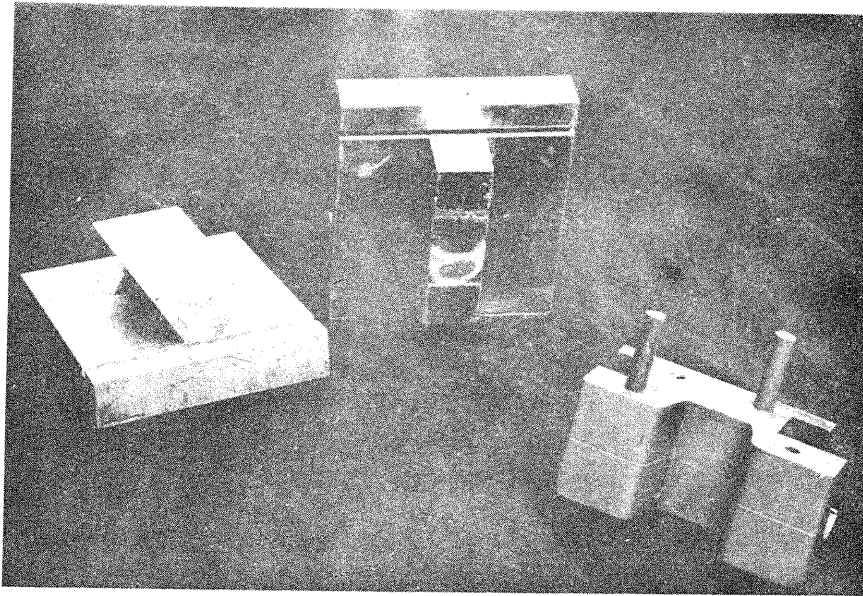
TWO MACHINING CATHODES AND TYPICAL WORKPIECE
